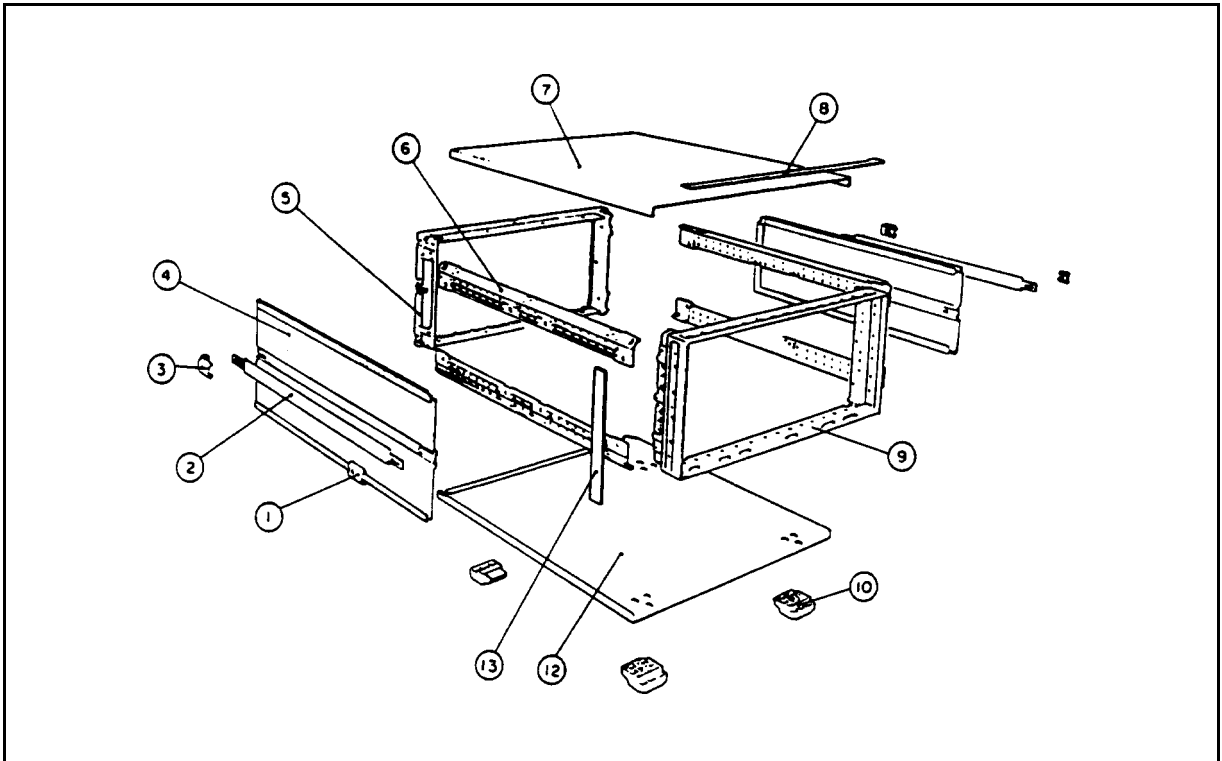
Miscellaneous Parts 2 (Chassis)
